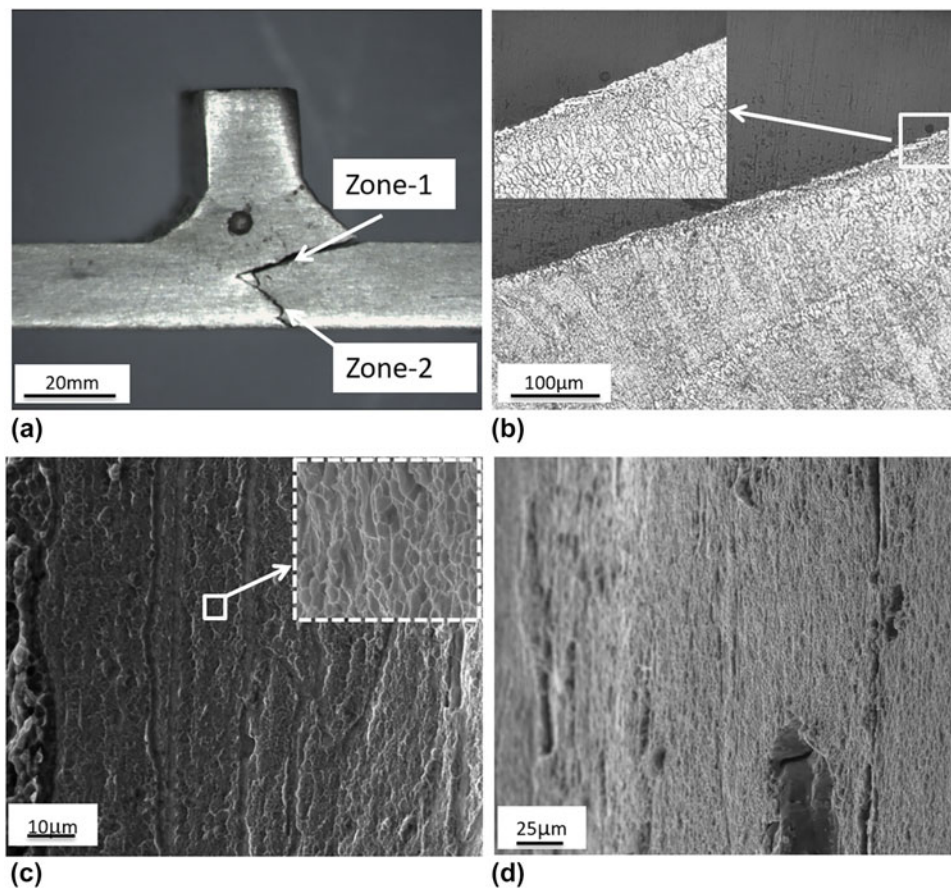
(a) Stereo micrograph of the fracture weld joint. (b) OM images of the fracture surface. (c) SEM image of zone-1. The inset is the magnification of the dimples. (d) SEM image of the fracture showing weld defects.
